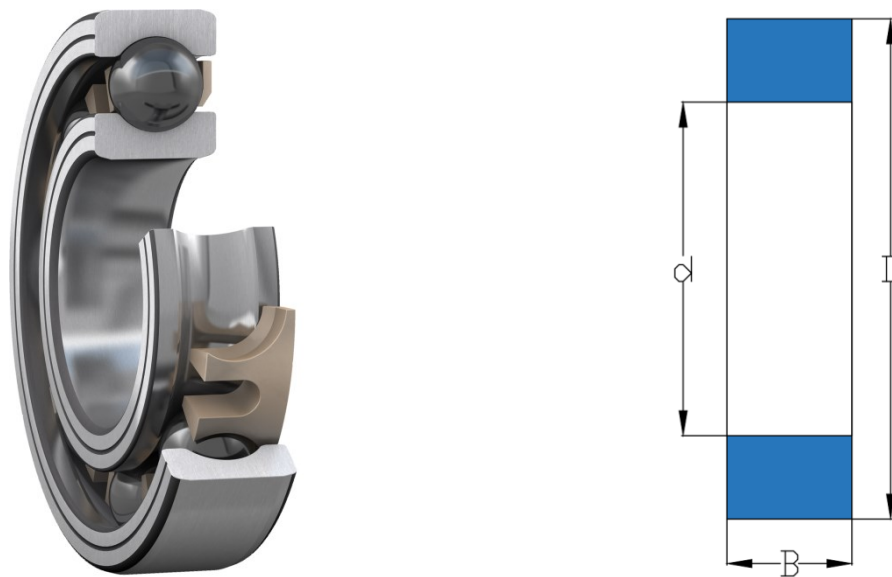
Hybrid deep groove ball bearing (a) global view (b) side view
